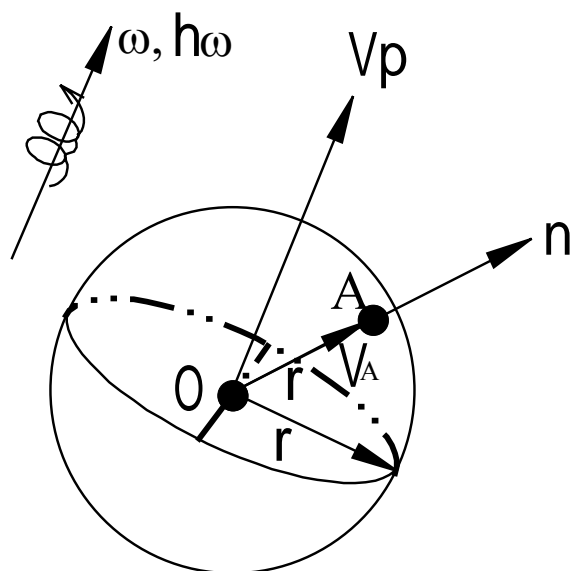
Cutting Circular arc tooth profile by spherical cutter
